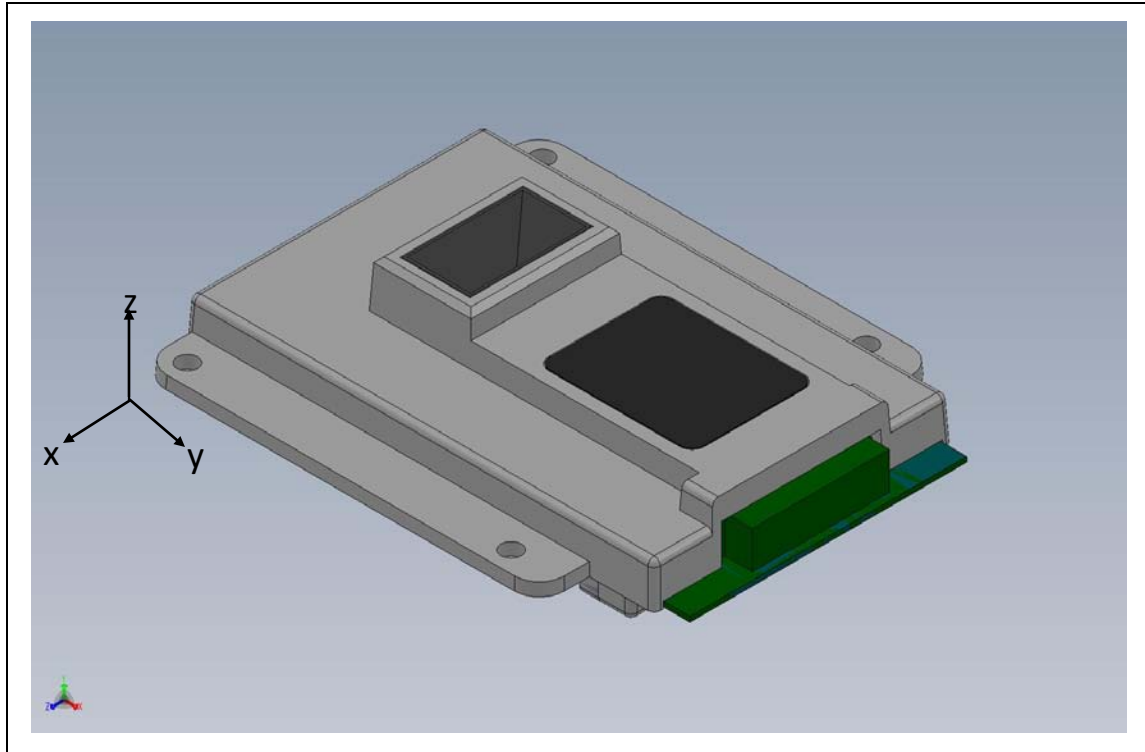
3-D Model of PCB Enclosed in Anti-Tamper Enclosure
